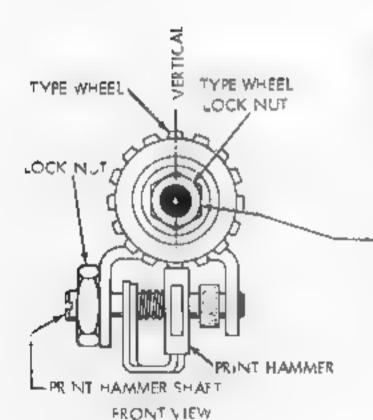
PRINTING MECHANISM FOR FULLY PERFORATED TAPE
